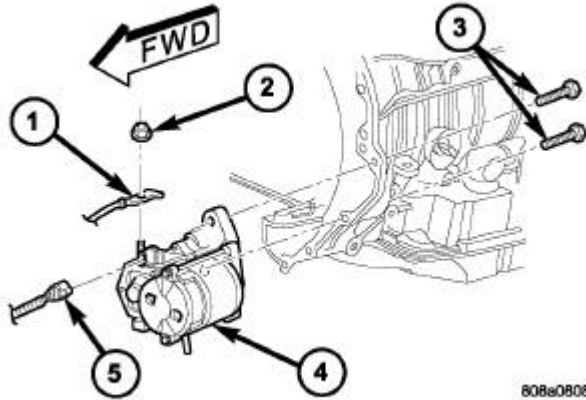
STARTER REMOVAL/INSTALLATION - 3.7L/4.7L - AUTOMATIC TRANSMISSION
